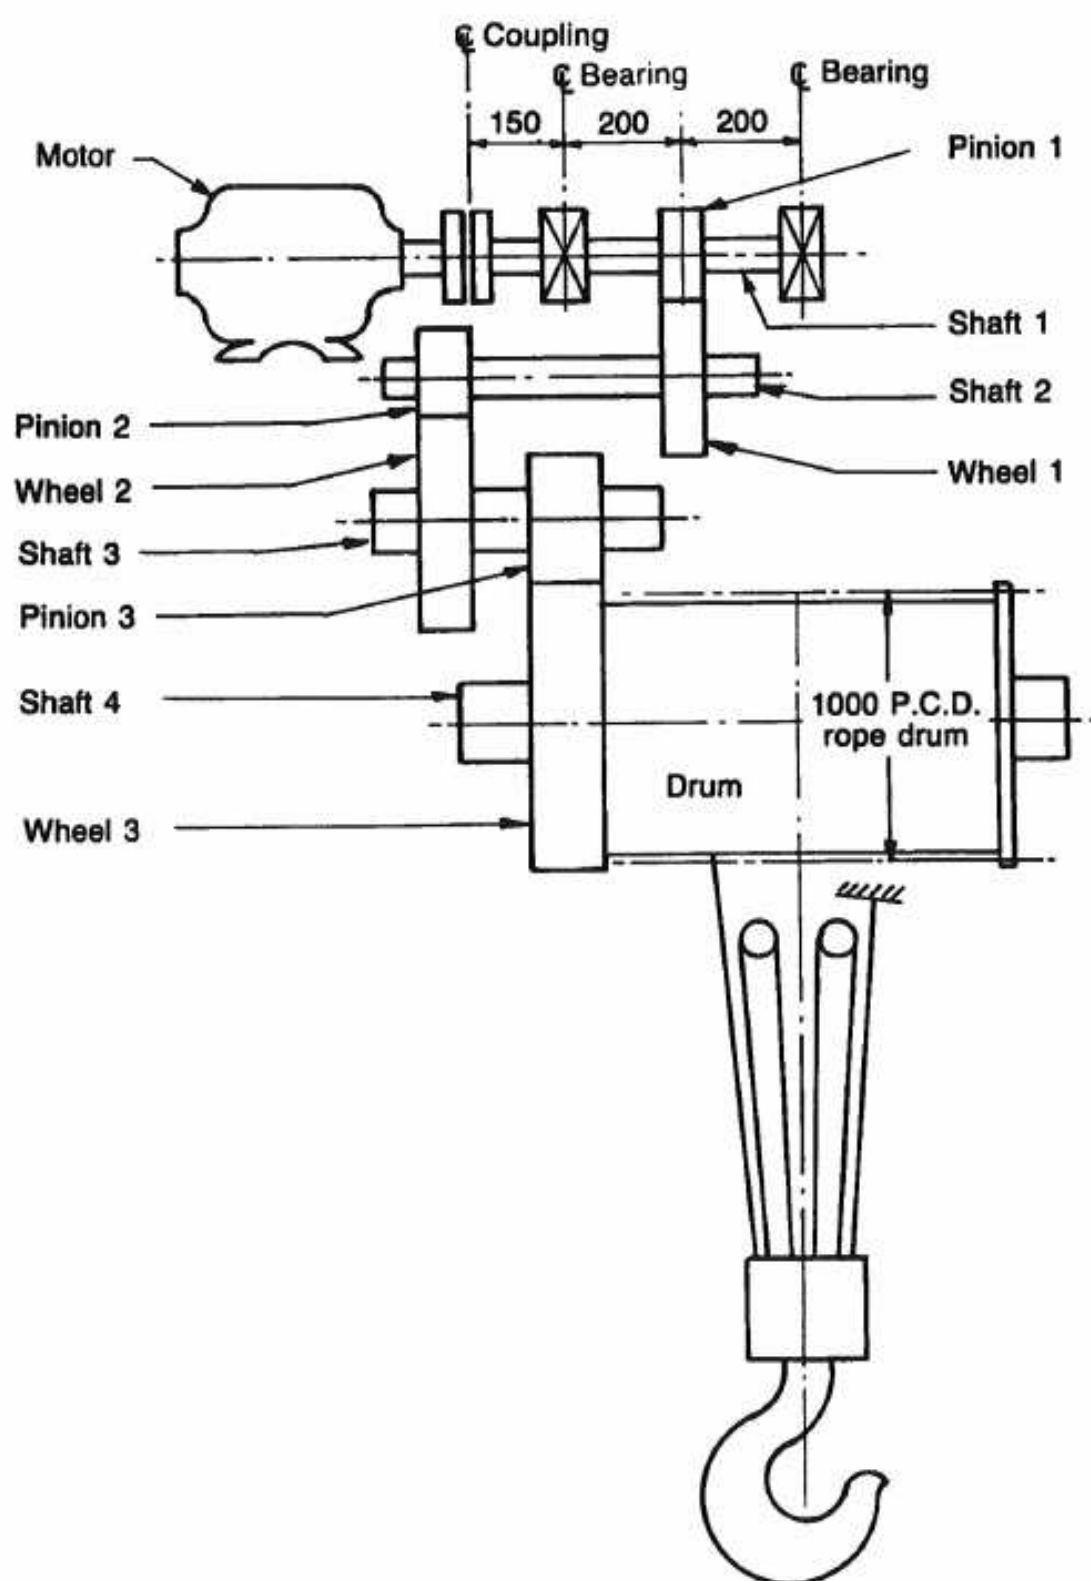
SCHEMATIC DRAWING OF CRANE HOIST DRIVE
